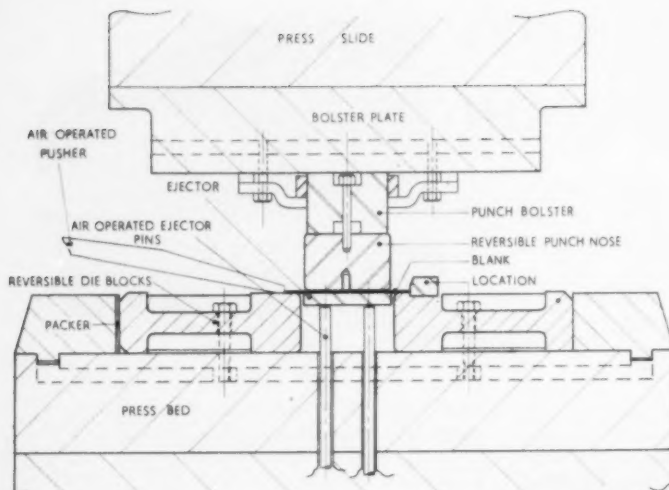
(left).—Section through a typical tool for hot pressing side members, showing reversible die blocks
